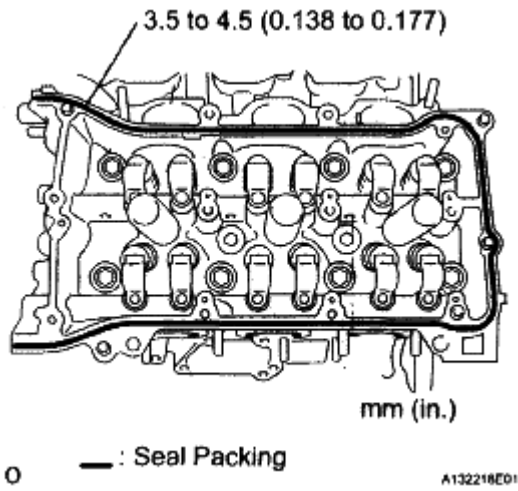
Identifying Camshaft Housing Sub-Assembly Seal Packing Diameter
